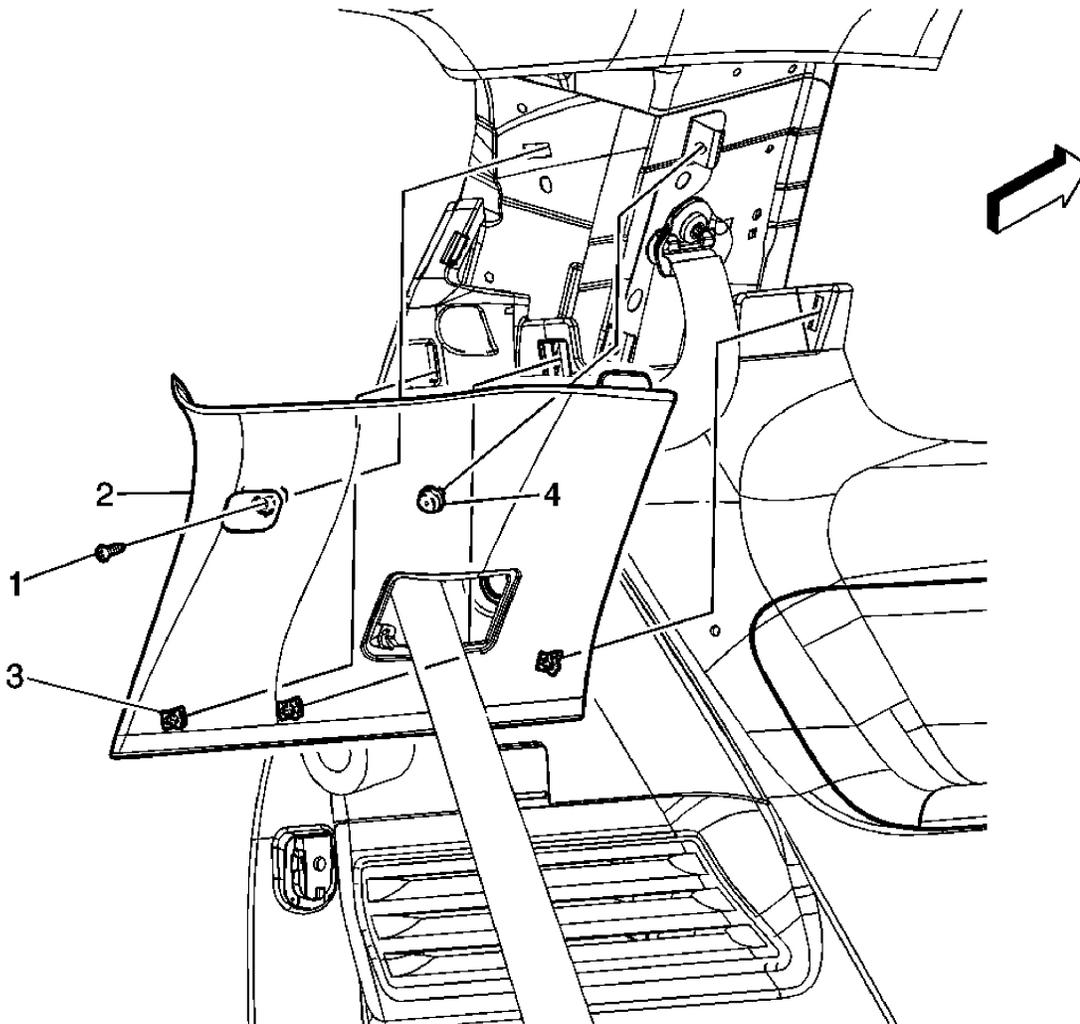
Identifying Rear Quarter Upper Trim Panel
